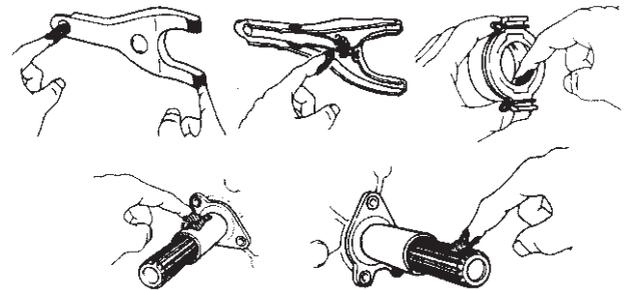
The contact points of the fork and release bearing along with the transmission quill and clutch splines should be lubricated with a very thin film of grease. (Courtesy of Toyota Motor Sales USA, Inc.)
